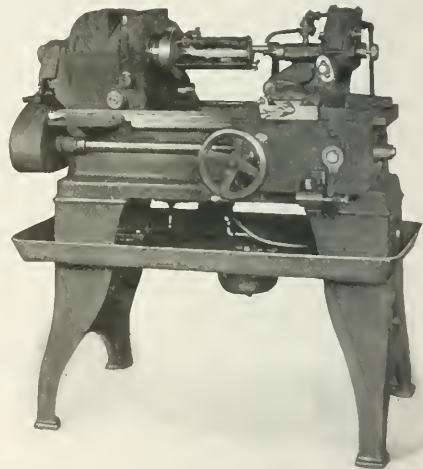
Internal Thread Milling Machine for threading Rifle Receivers
